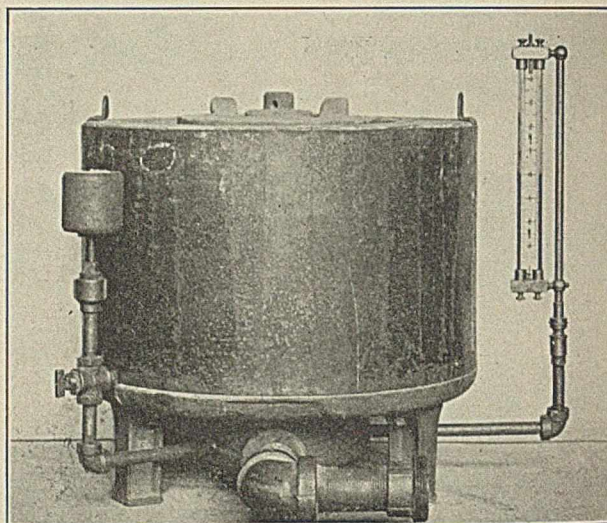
SIDE VIEW OF CRUCIBLE FURNACE SUPPLIED BY HOLES DRILLED IN RADIAL RIBS BETWEEN MIXTURE CHAMBER AND FURNACE BOX. MIXTURE SAMPLING BURNER IS SHOWN AT THE LEFT
